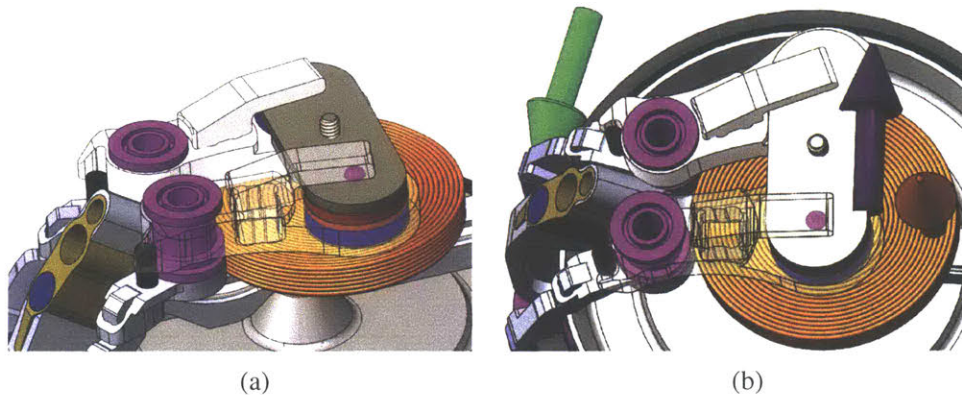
This figure illustrates the braking linkage which transfers force from the short-stroke linear motor to the braking band. Panel (a) highlights the bearings which make up the four bar linkage, including 4 flanged bearings supporting the front two arms, in addition to the combination jewel (White flexural lever arm combined with a small metal sphere) and journal bearings (provided by the arms CNC machined out of PEEK plastic. Panel (b) shows the three relevant forces during a braking event. The *orange* arrow shows the magnetic field generated by the solenoid coil. This causes a force on the far link of the four-bar linkage in the direction of the *purple* arrow. This force is transferred through the four bar linkage, and through a one-way clutch to the proper arm of the breaking band, which pulls it in the direction of the *green* arrow.)
